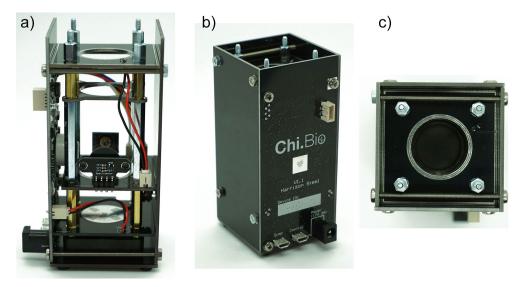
Assembly of Chi.Bio sides, using M3x55mm screws. a) Attaching Side and SideA PCBs, after which all internal wires should be connected. b,c) Attaching two SideB PCBs.
